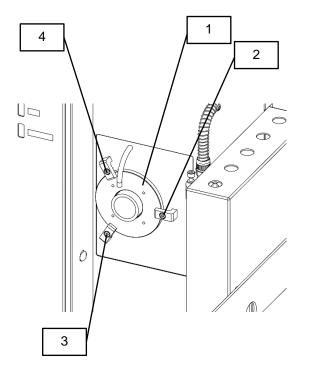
Front of the HTFr with furnace locking device removed and O-ring removed Insert the combustion tube as follows:
